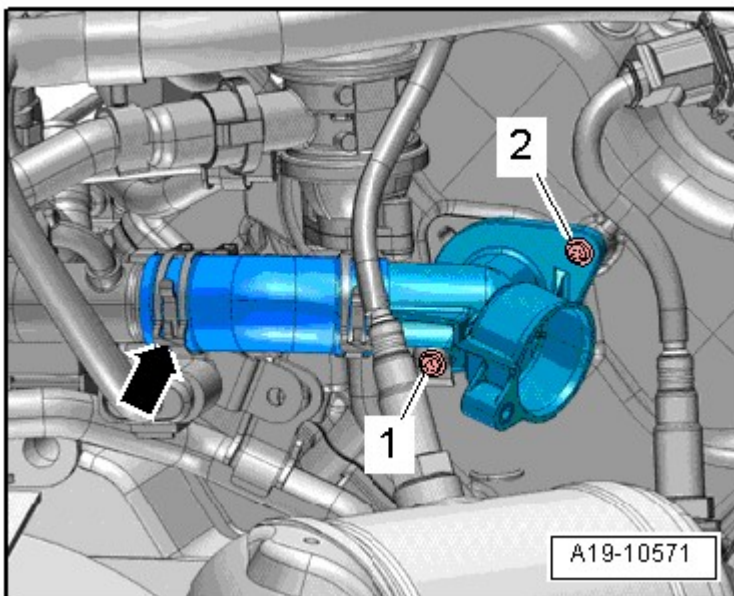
Identifying Bolts And Coolant Connection, Removal
